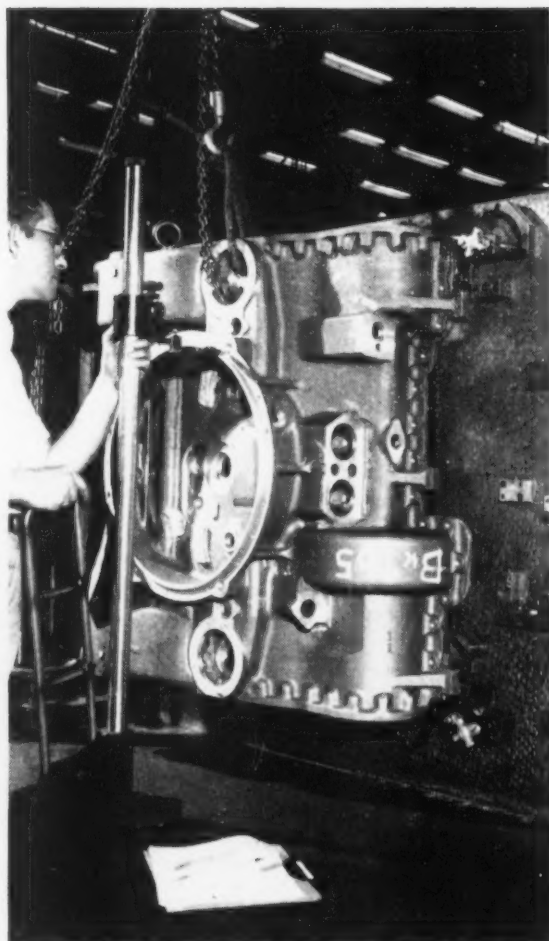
Angle plate fixture for checking location of bored holes in relation to construction holes. Step buttons at right are used to set height gage at zero for each hole to be checked.
